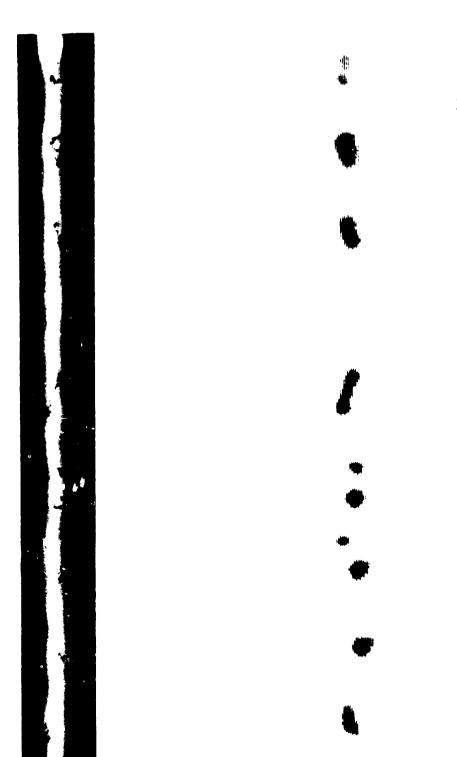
An ultrasonic C-scan of a weld compared to a radiograph of the weld.
